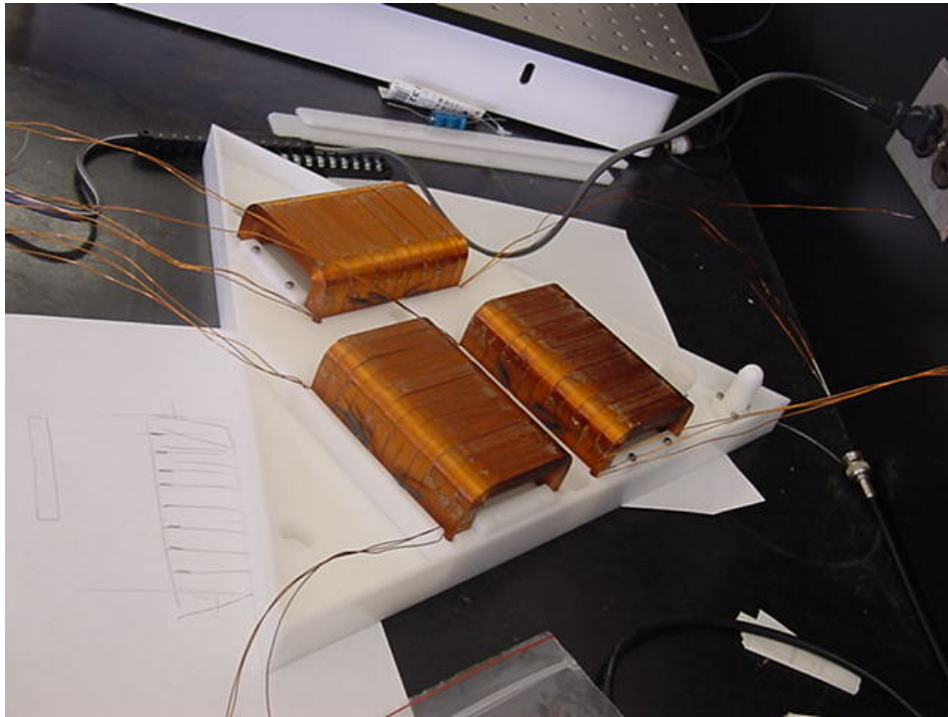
Planar motors are under assembly. (The inner leads of the windings are soldered inside the windings and outer leads are connected in the side of the windings to make a flat bottom plane for the planar motors.)
